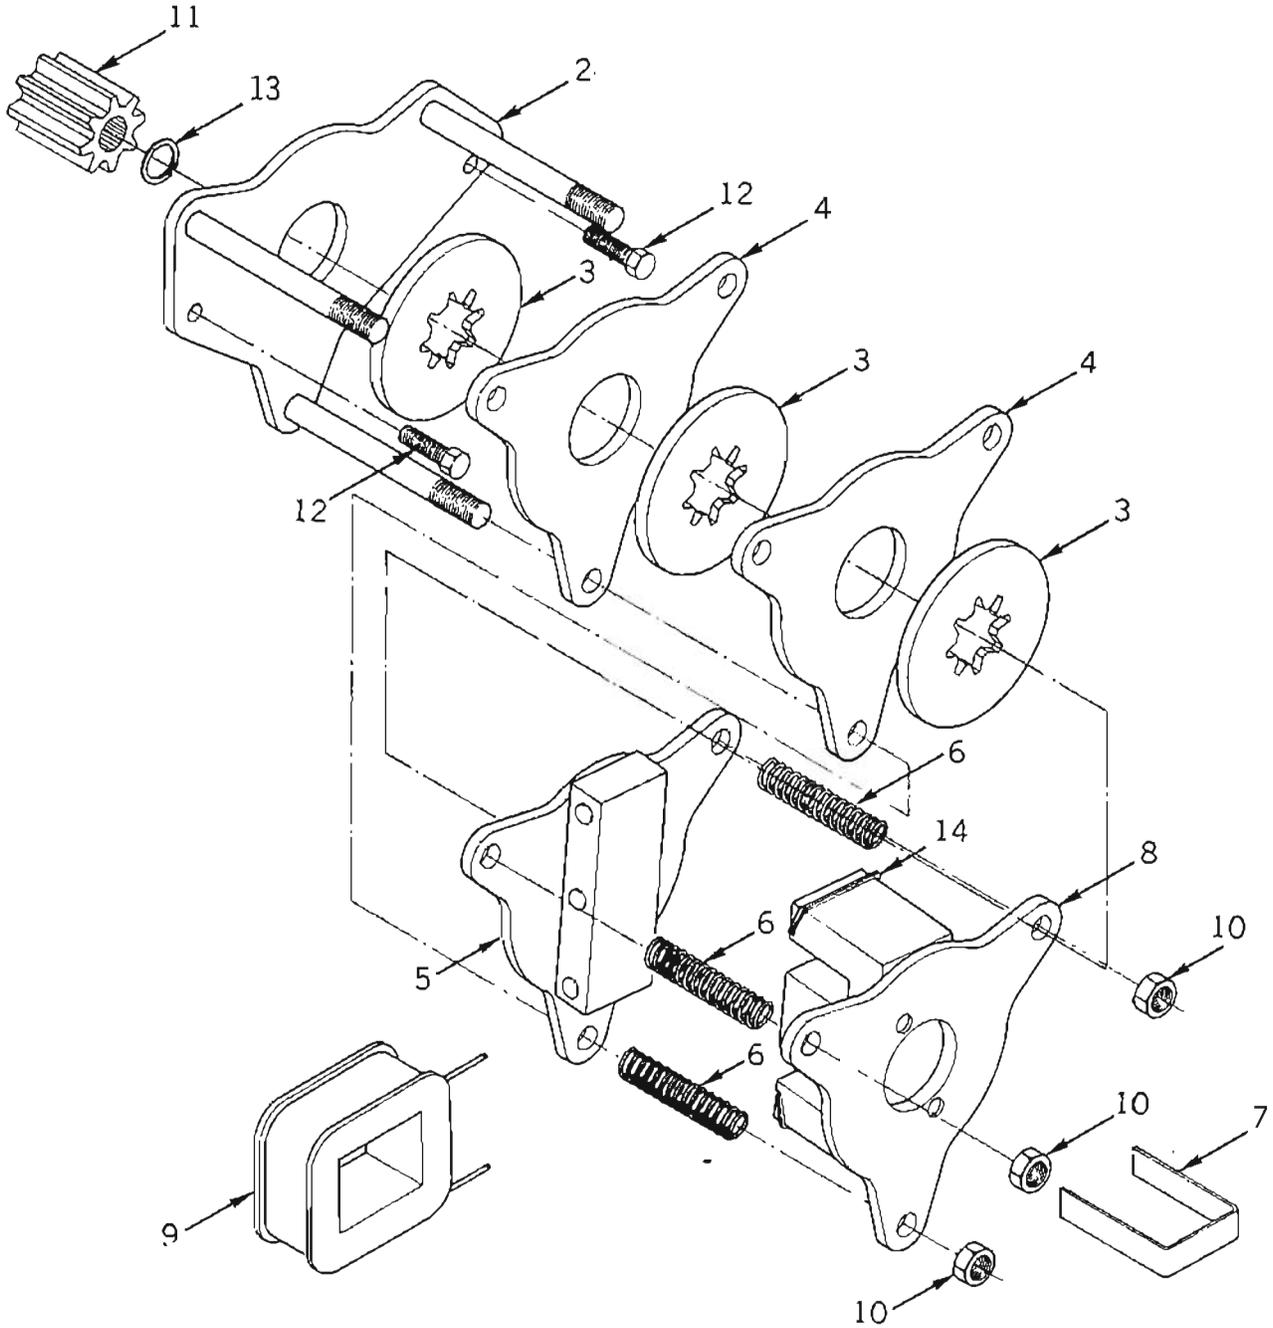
A. BRAKE AND SOLENOID PARTS
